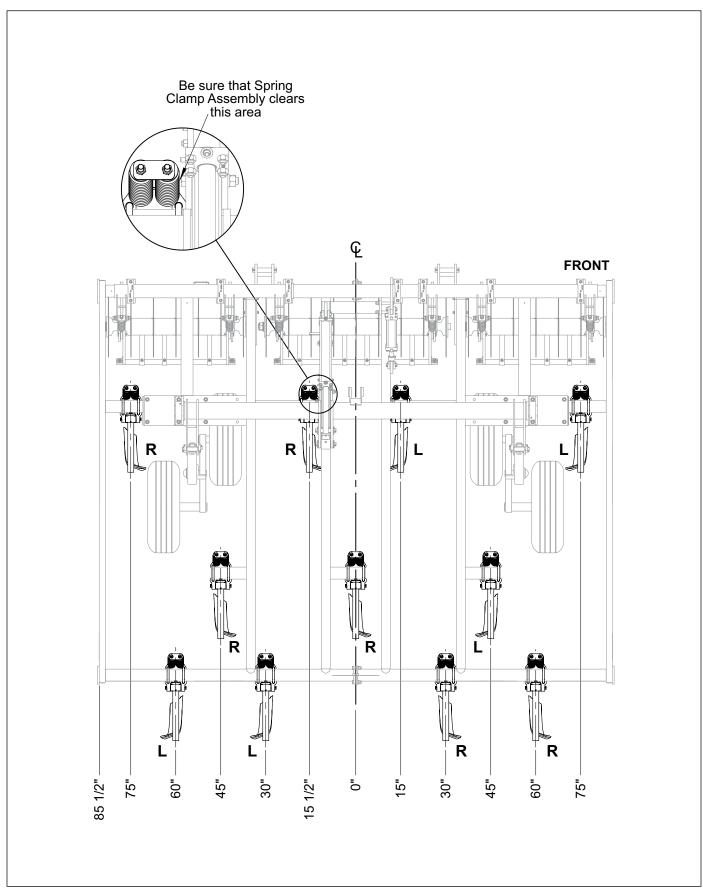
11 Shank, Tandem Wheel Machine, Top View
